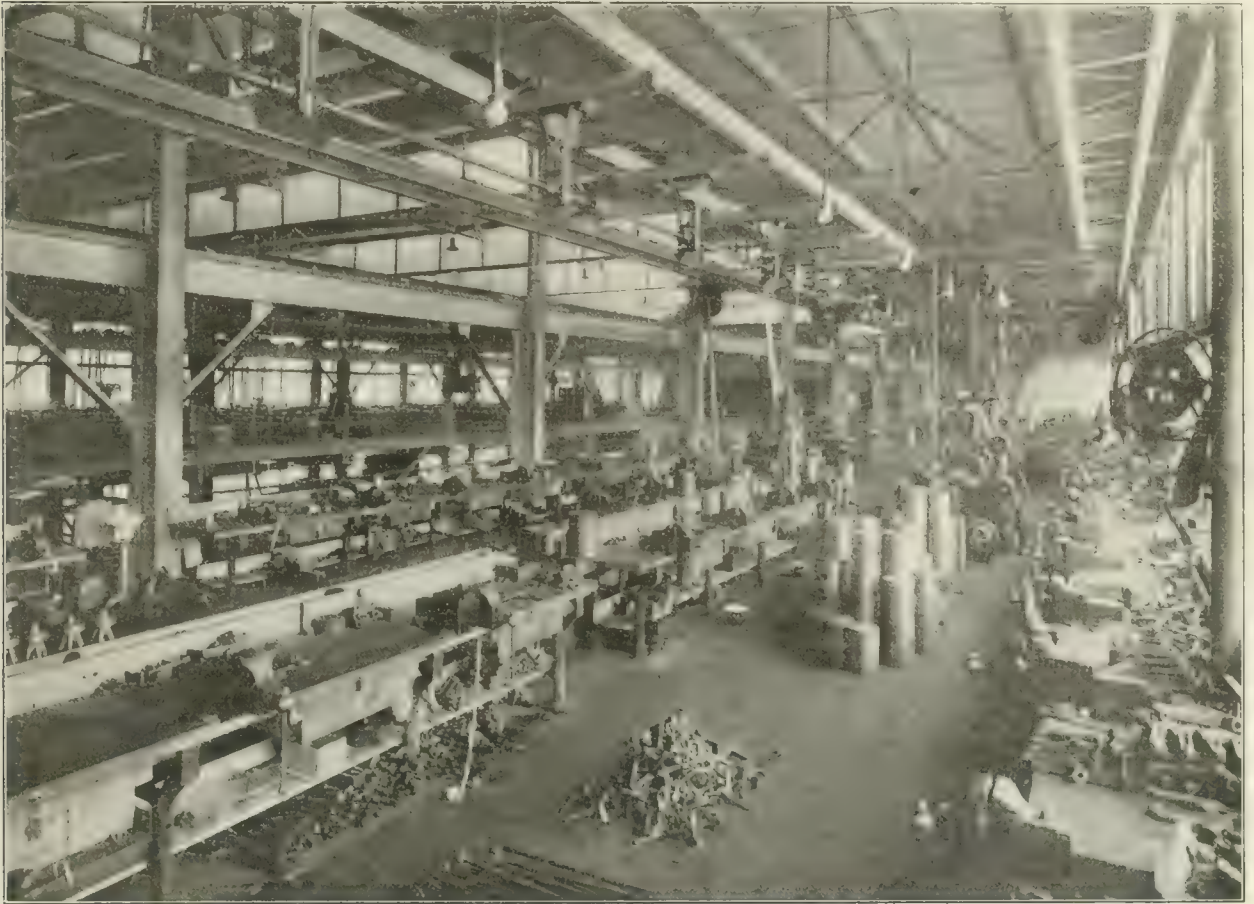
View of West Gallery of Machine Shop, Where Light Machine Work, Bench Work and Assembling of Small Parts are Handled.
